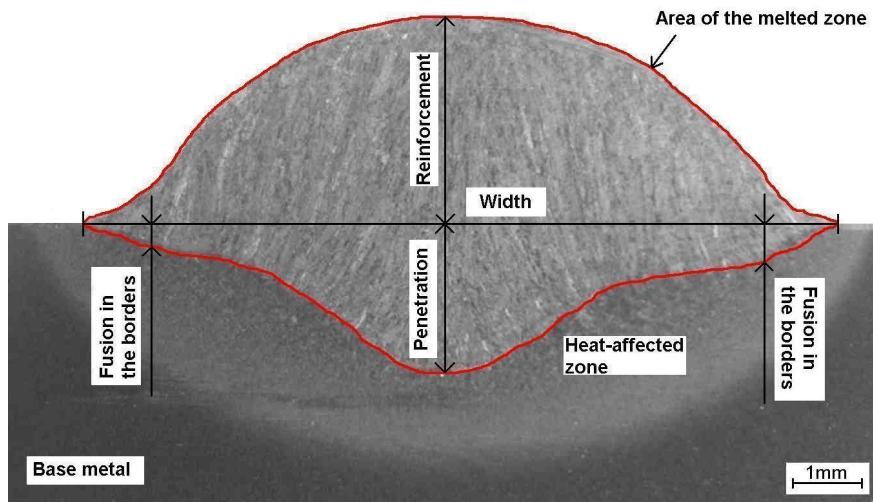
Traverse section of the weld bead using the mixture M3
